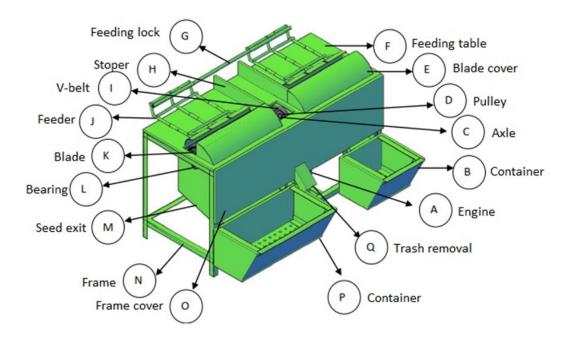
Cassava seed cutting machine (PETOKONG) double block cutter type
